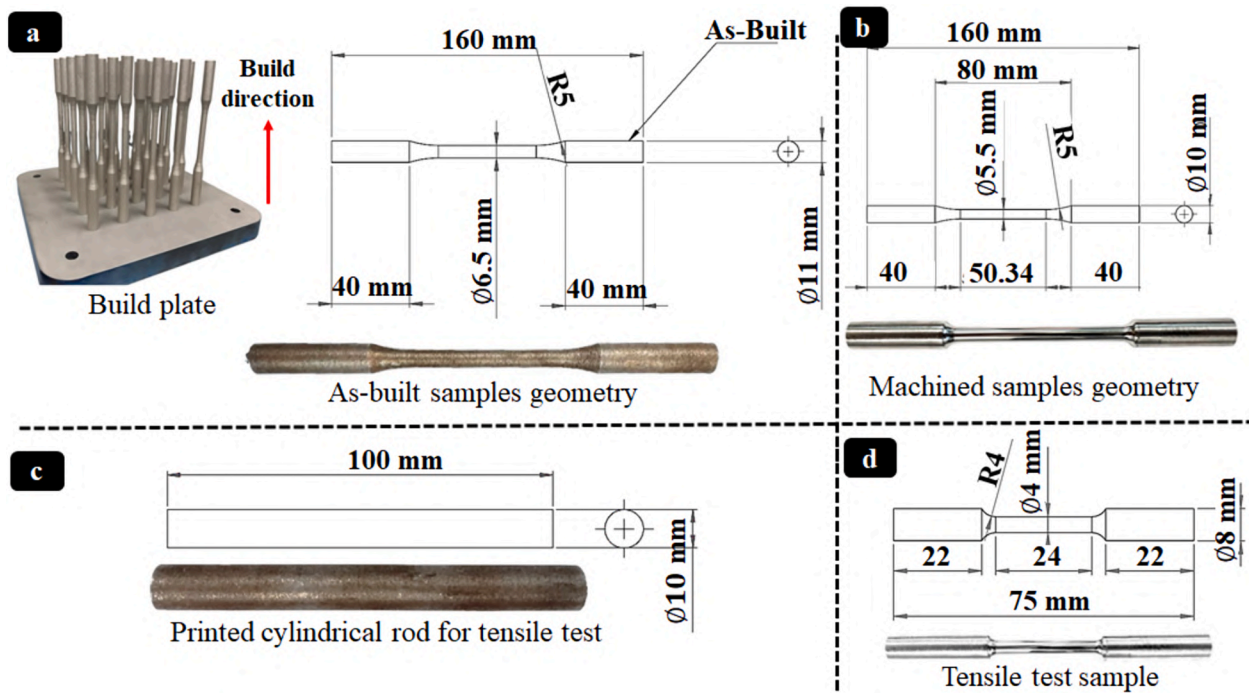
a) as-built dog bone specimens and additively manufactured build plate, b) mached specimens geometry based on ISO 1143, c) printed cylindrical rods for tensile test, d) tensile test standard specimen's geometry based on ASTM E8.
